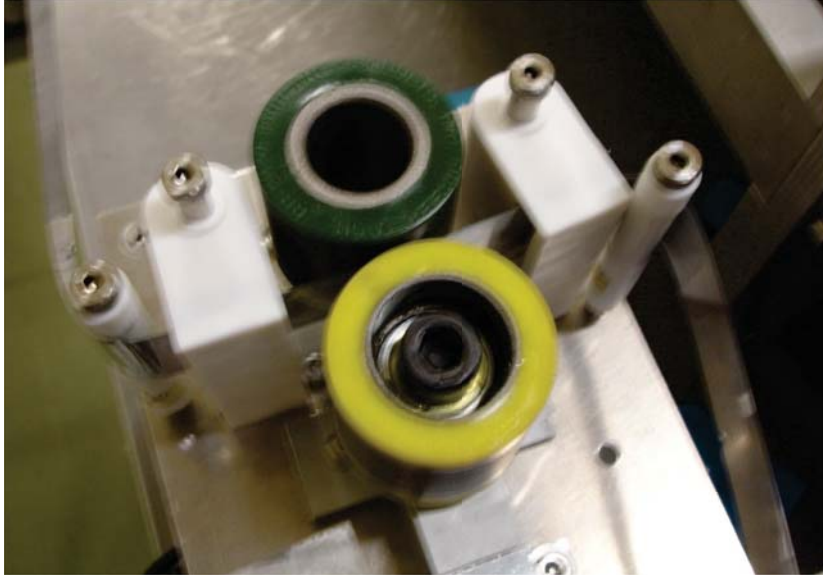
Prototype driving assembly. The tape is pushed against a drive roller (green) by the idler roller (yellow). Teflon guides (white) constrain the tape's position.
